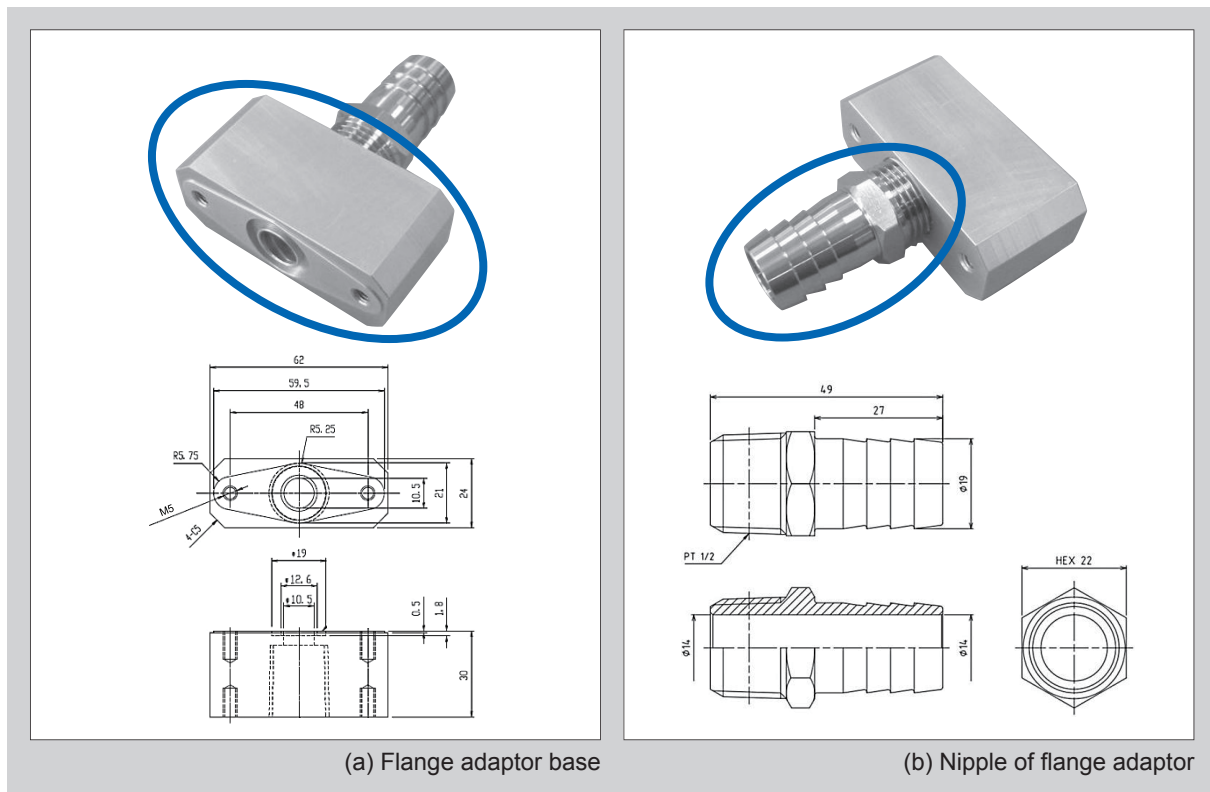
Flange adaptor kit : flange adaptor base and nipple
